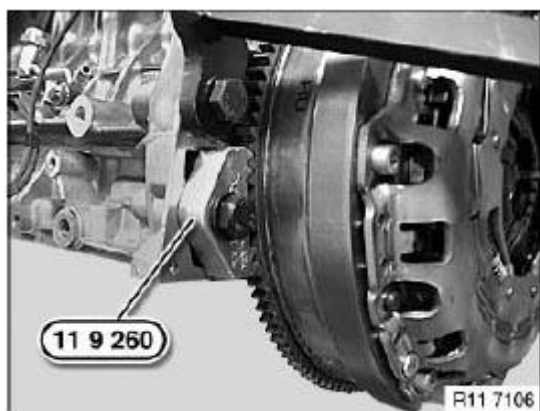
Securing Flywheel (Crankshaft) Using Special Tool 11 9 260
